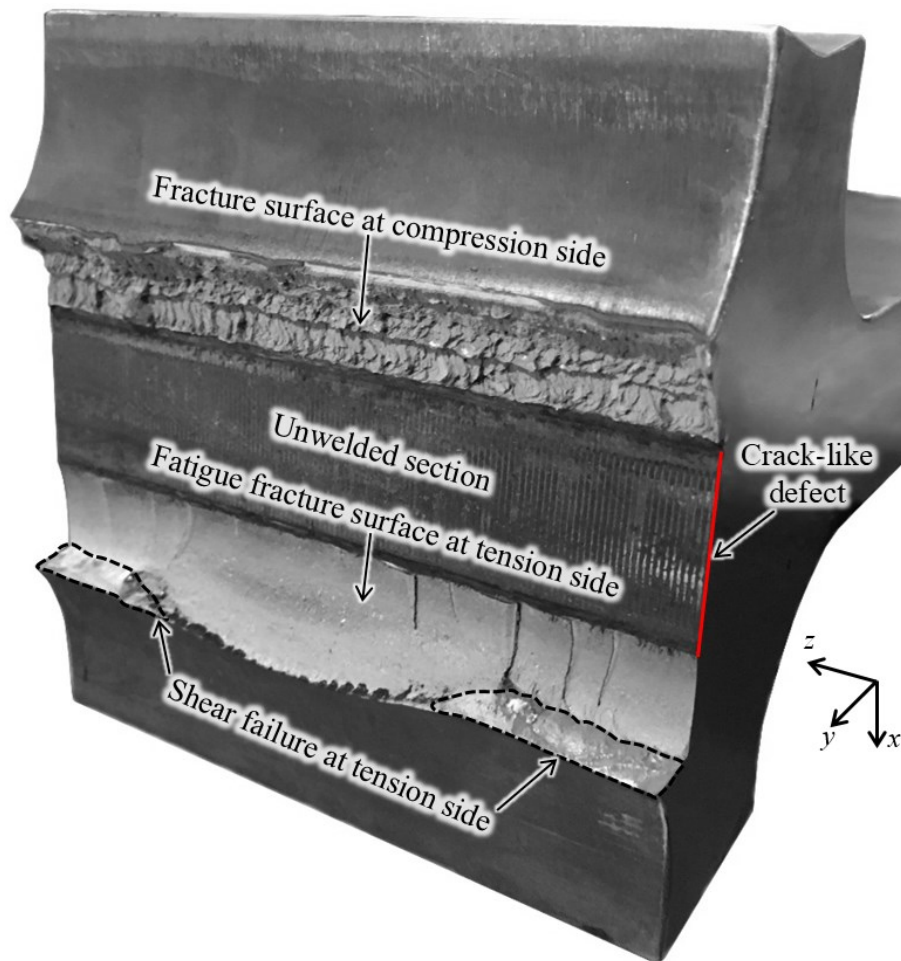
Welded joint of T2 after final failure at the weld root
